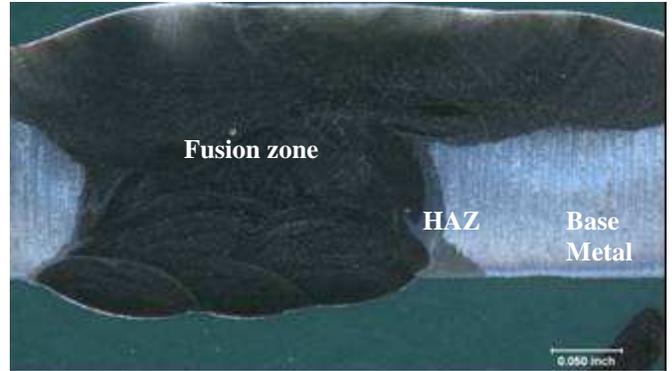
Cross-section of weld repair showing no microfissuring or post weld heat treatment cracking
